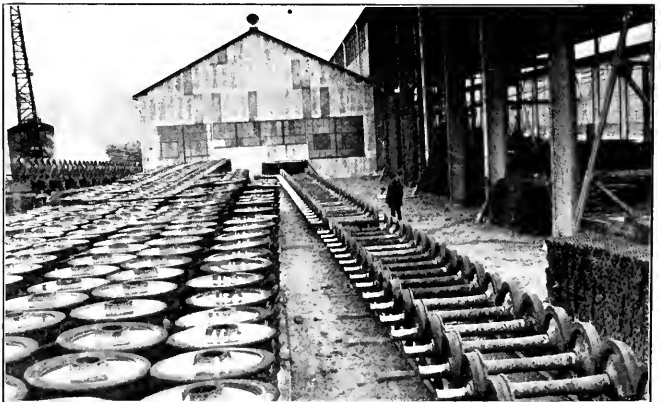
CAR WHEEL AND COMPLETED WHEEL AND AXLE STORAGE
